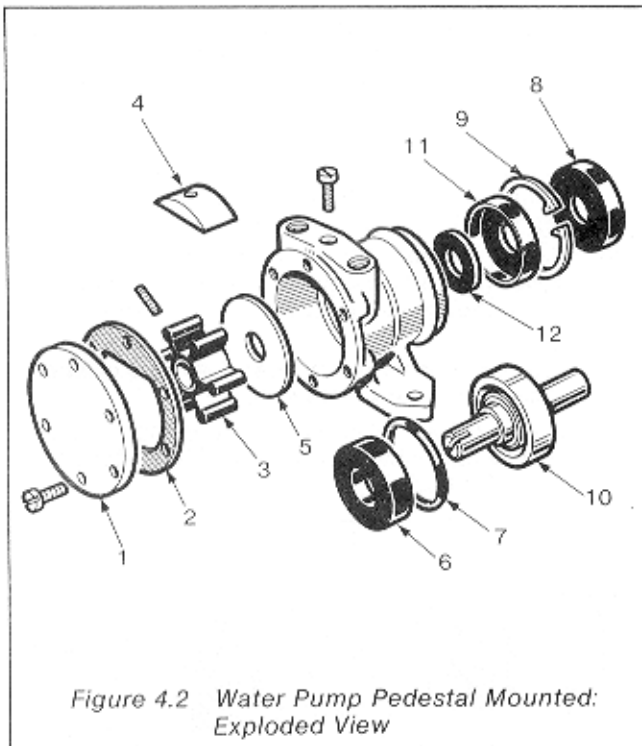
Water Pump Pedestal Mounted: Exploded View
